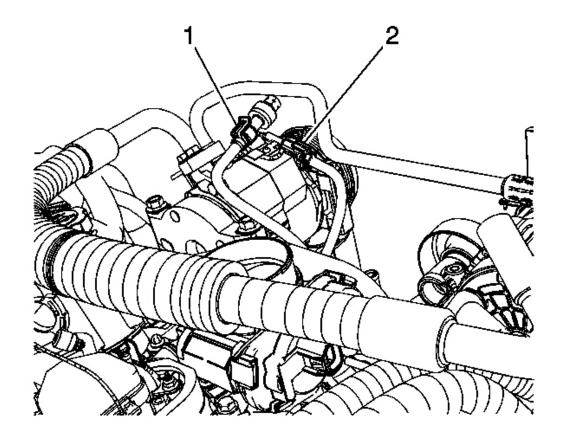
View Of A/C Pressure Switch & Compressor Clutch Connectors Courtesy of GENERAL MOTORS CORP.
